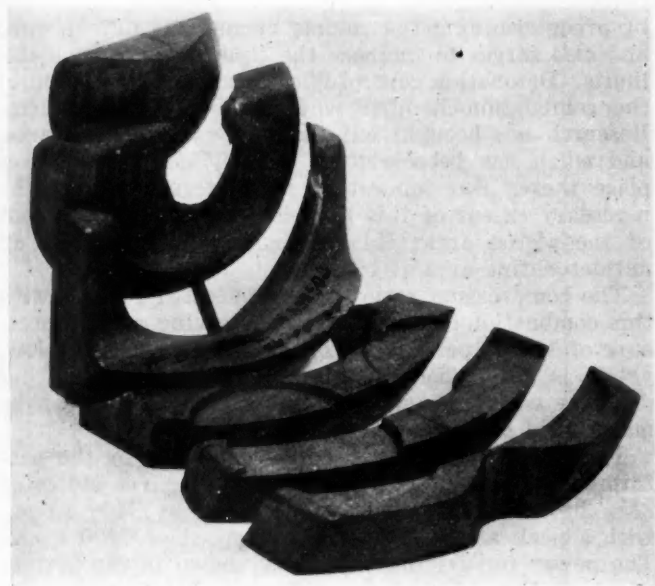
SECTIONED MODEL OF THE CHEVROLET COMBUSTION-CHAMBER
